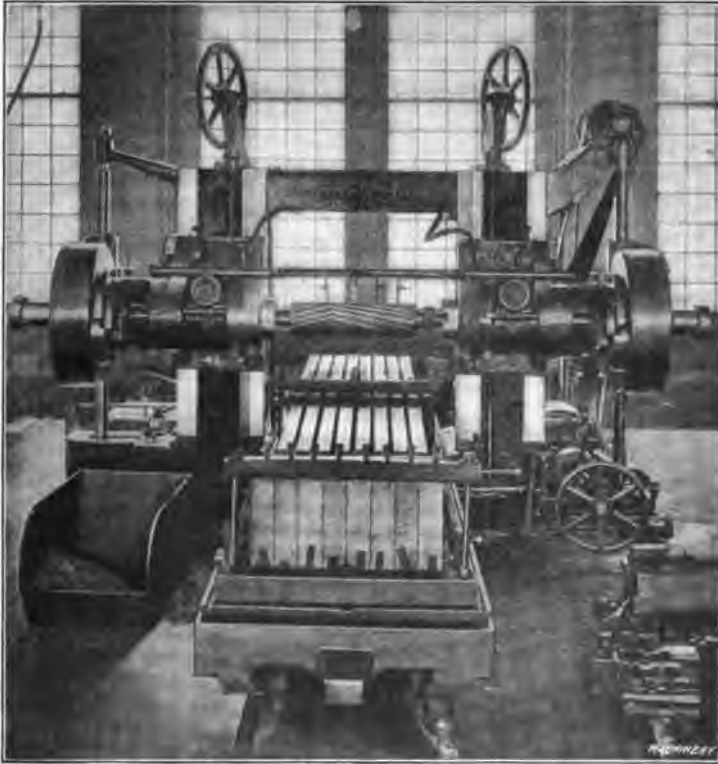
Channeling the Sides of Locomotive Main-rods on Horizontal Machine
